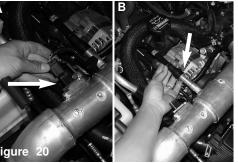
Figure A: Reconnect the MAF sensor harness to the MAF sensor *Figure B:* Connect the crank case vent tube to the machined nipple on the intake pipe. Make sure you hear a click indicating a secure fit and seal
